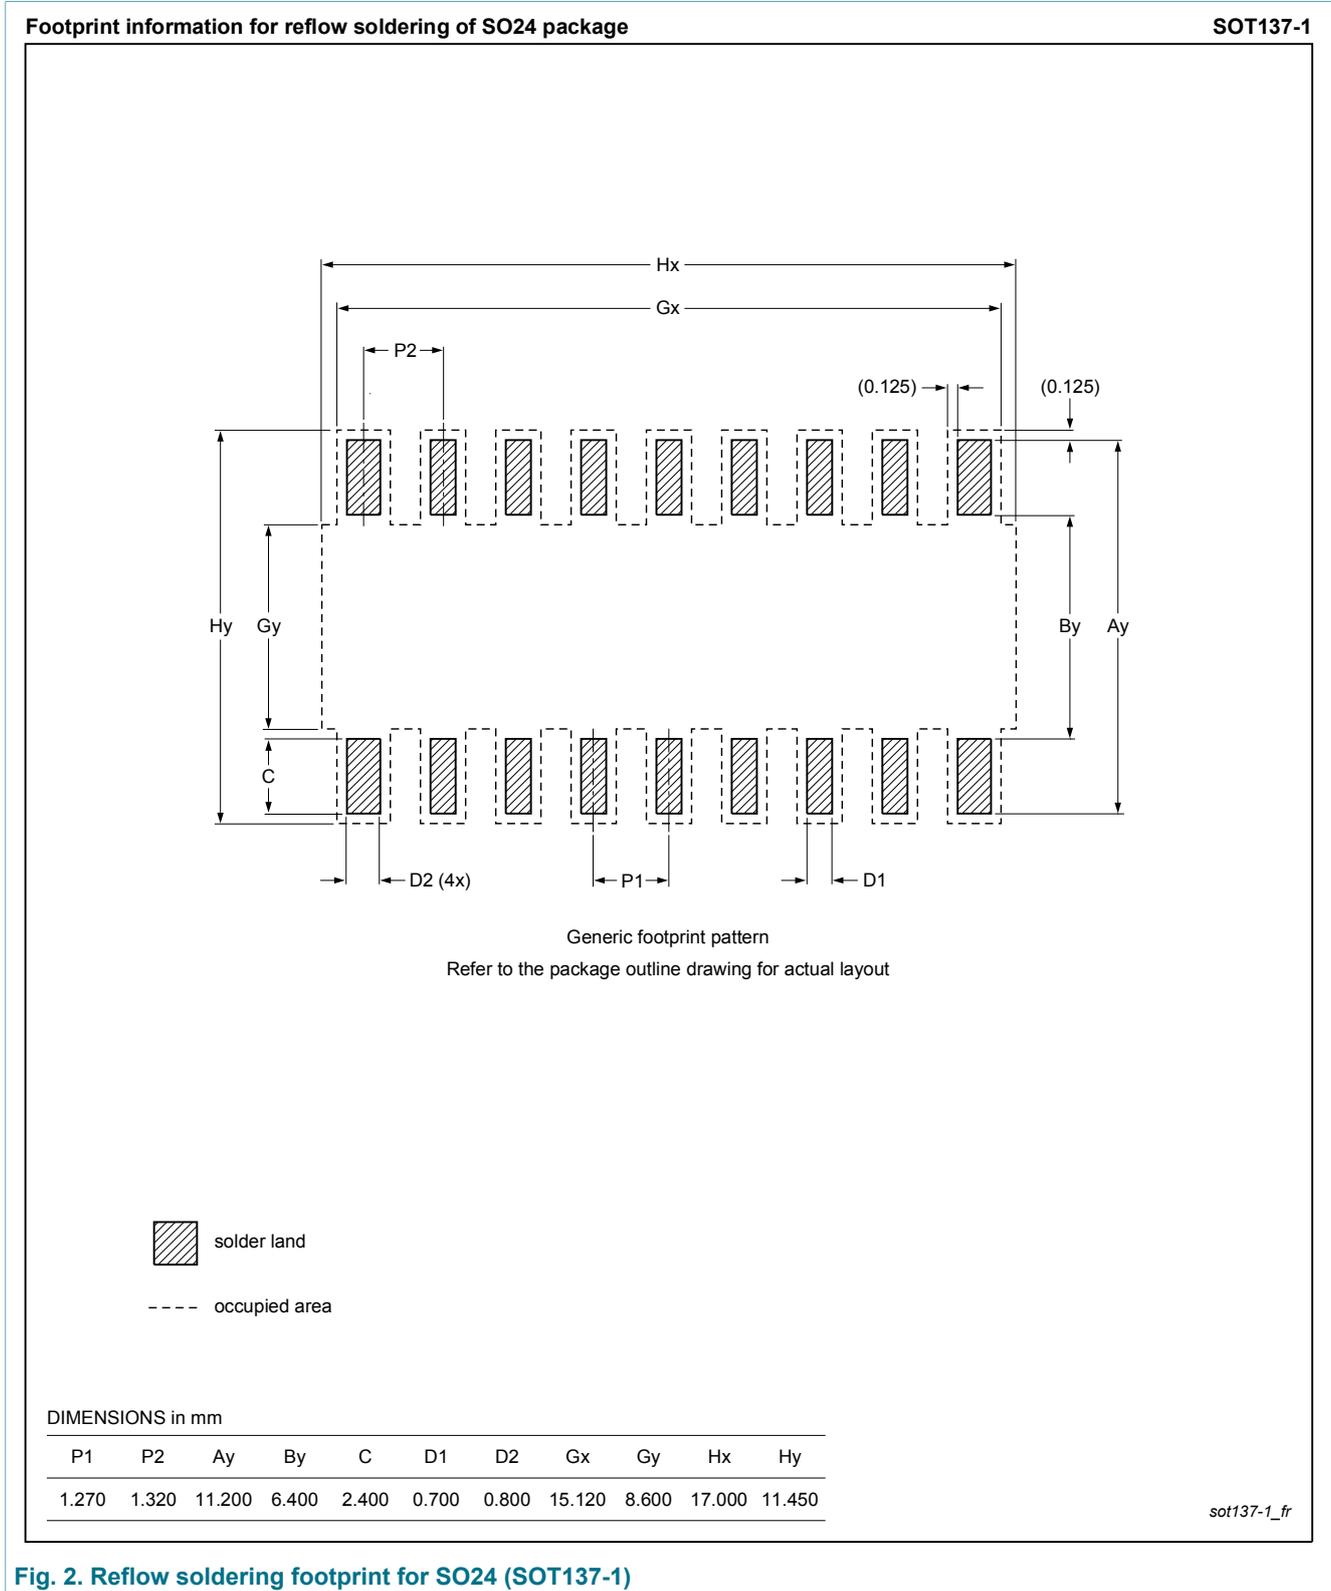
Reflow soldering footprint for SO24 (SOT137-1)
